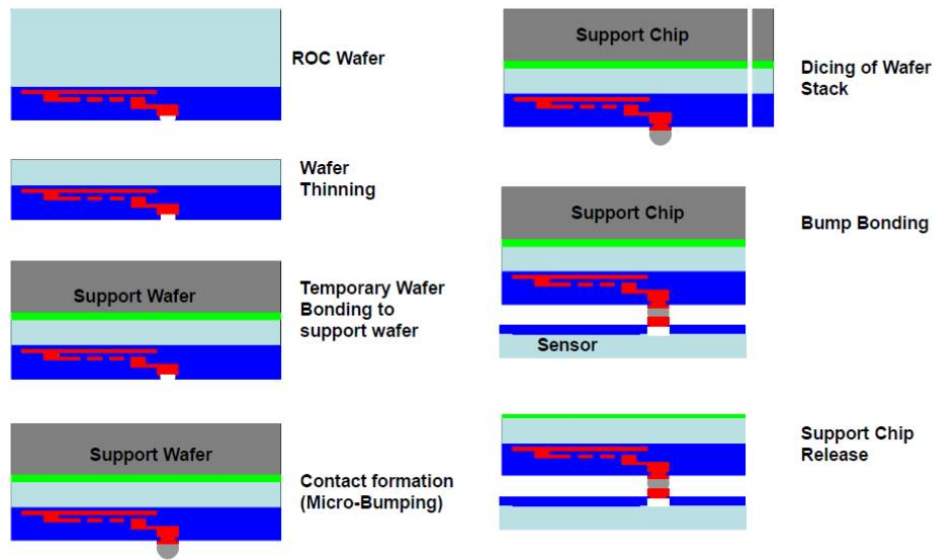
Illustration of the IZM modified flip chip process using a temporary wafer bonding technology. The Readout Chip (ROC) wafer is bonded to a support wafer during bump bonding and flip chip. The support wafer is removed only after flip chip assembly (courtesy of IZM).
